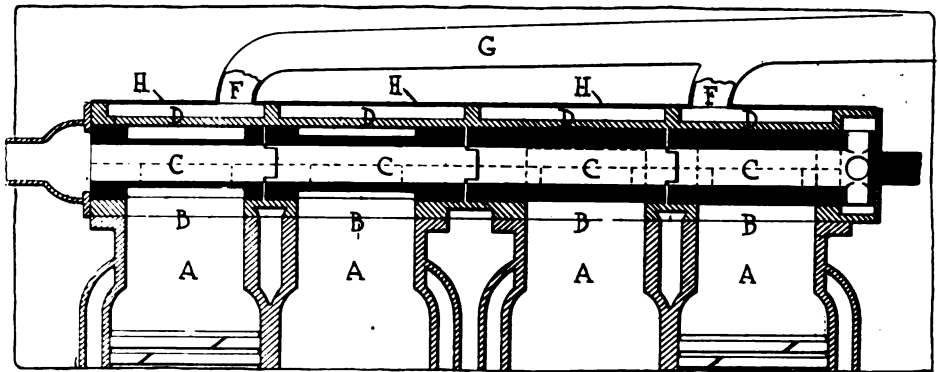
Longitudinal section through Bournville motor, showing valve in four parts
